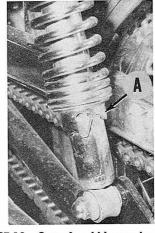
Cam ring (A) may be placed in any of three positions to vary spring tension. Both rings should be adjusted the same.
